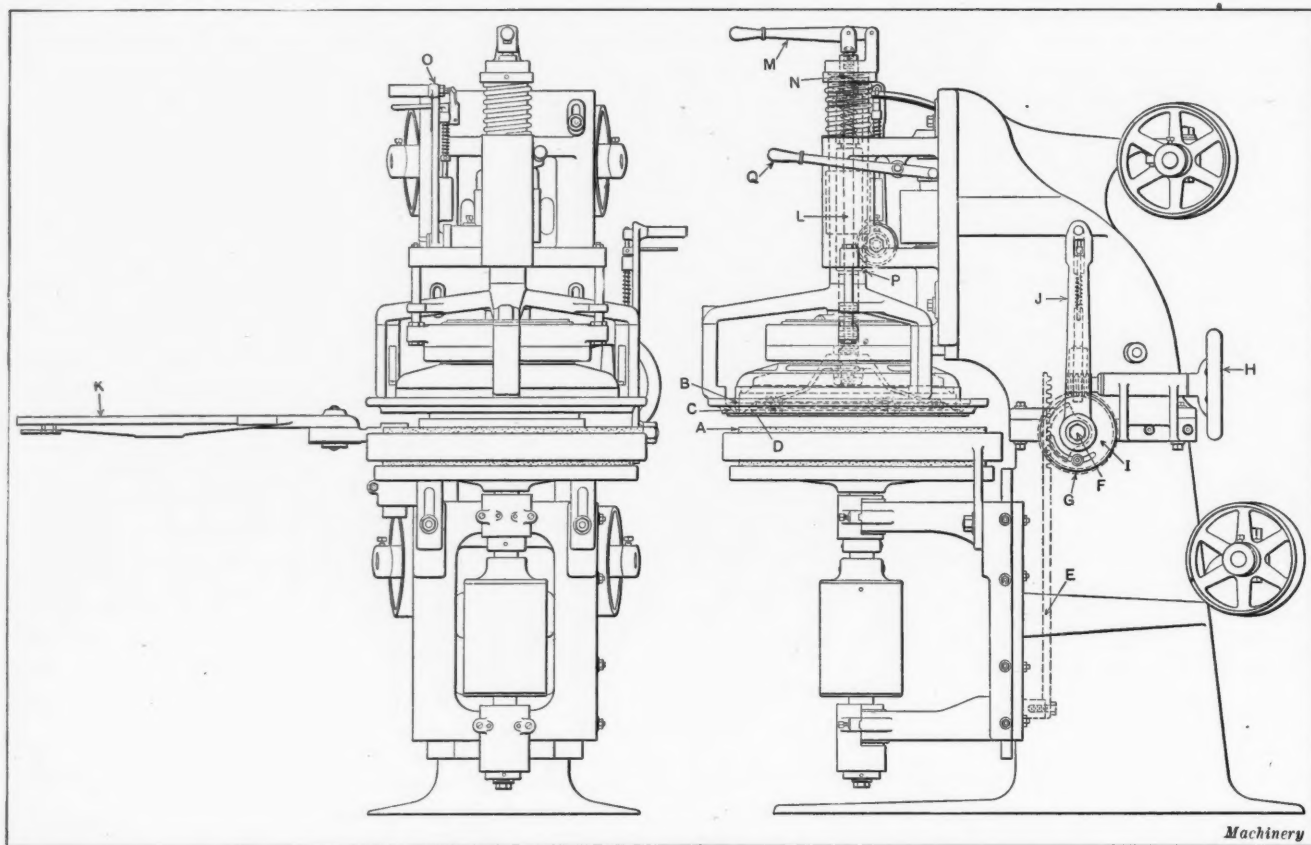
Front and Side Views of Dry-grinding Machine, illustrating Principle of Operation
